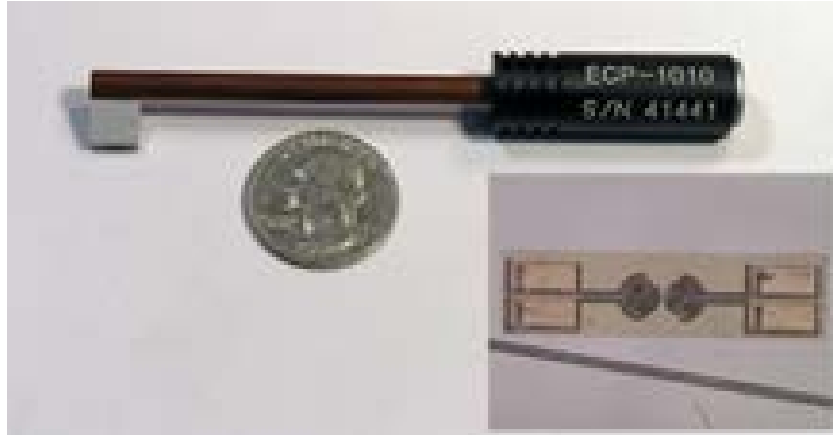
Overall Photograph Of The Special Probe Purchased For The Scallop Specimen Experimental Measurements. Sensing Coils Are Shown In The Insert Along Side Of A 0.0038" Diameter Wire
